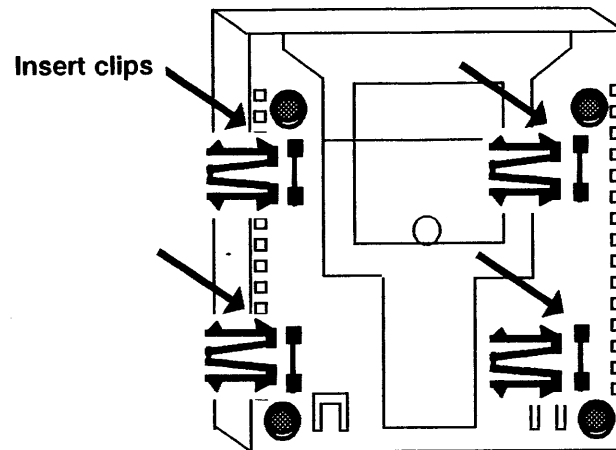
A. Cartridge Tape Drive or Floppy Disk Drive (Bottom View)
